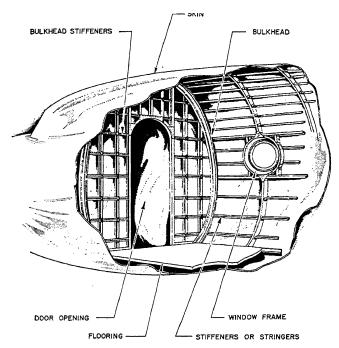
3-Typical Stressed Skin Fuselage Construction
